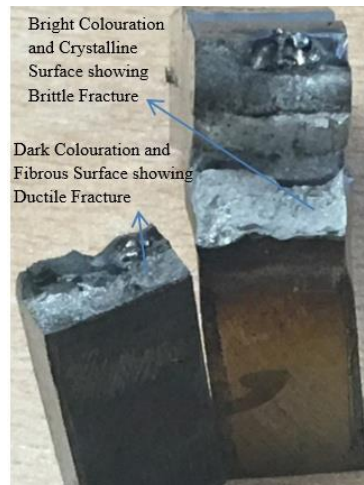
Fractured Charpy notch sample showing a brittle and ductile fracture of a 2MSSS
